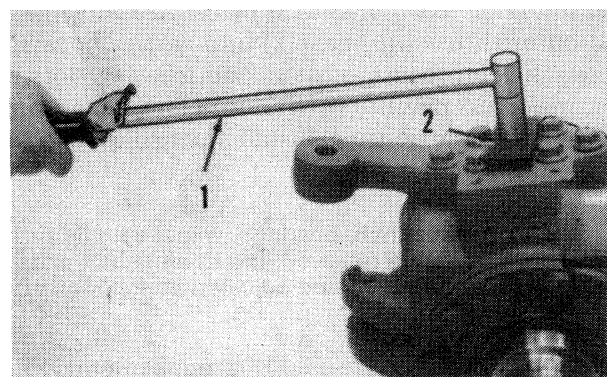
A—Use a spanner bar (2) with a nut welded in the center and a torque wrench (1) to measure torque required to rotate steering knuckle.
